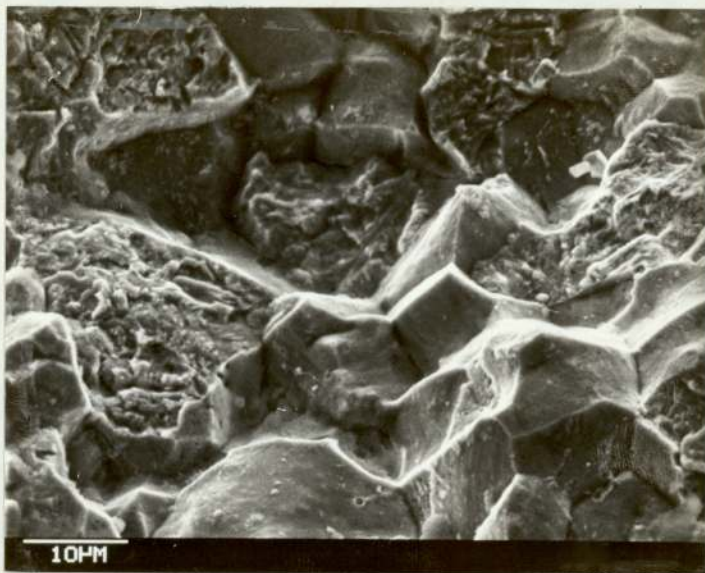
Fatigue fracture in carbonitrided
